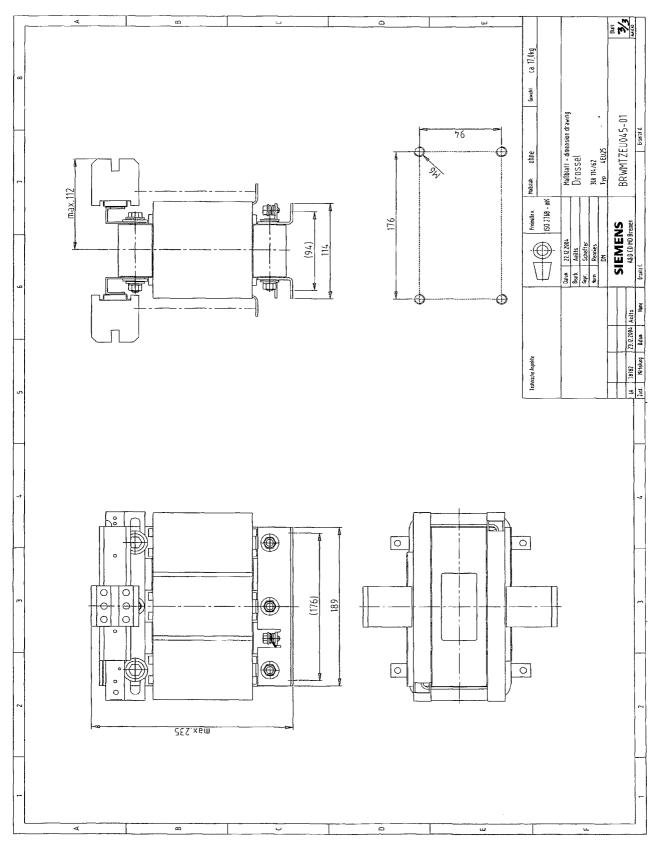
Dimension drawing of the line reactor for the Smart Line Module 36 kW
